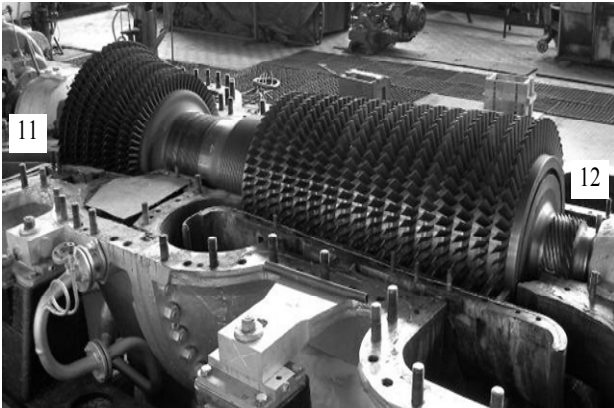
General view of the TAC rotor. 11, 12 – places of supports (bearings)
